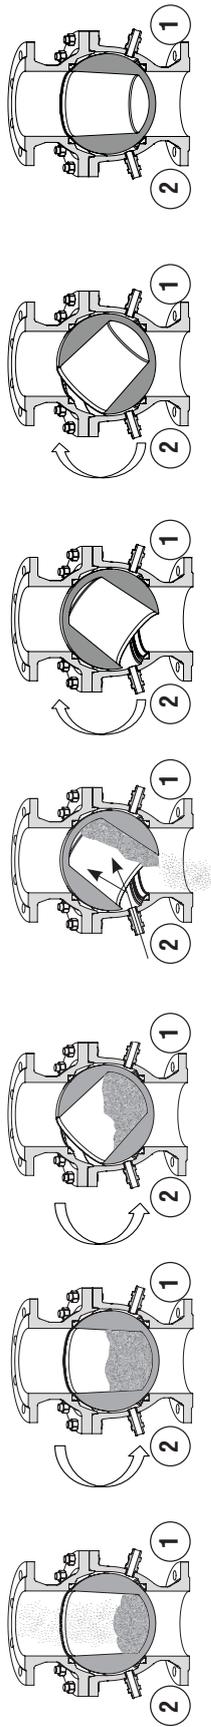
Mounting of the Pocket Valve in a Sand Separator application
